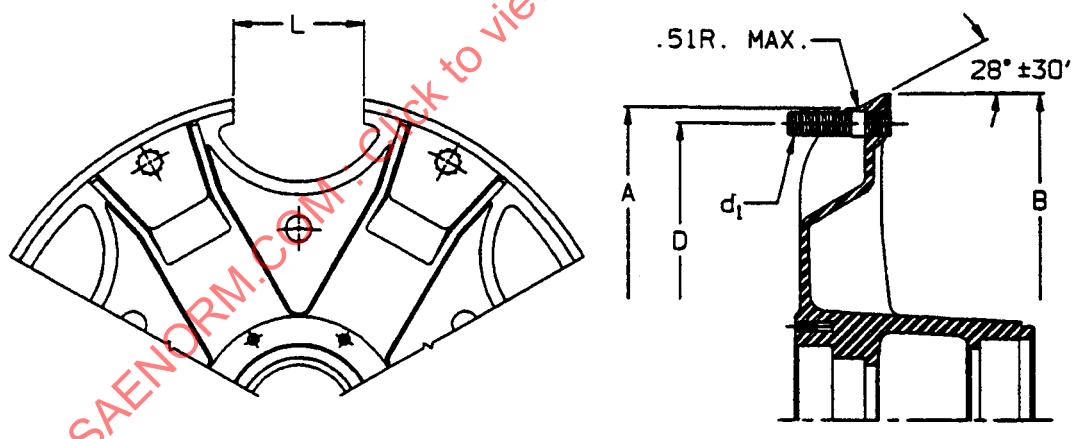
B—FRONT WHEEL WITH SPECIAL RIM LOCATOR SLOT
